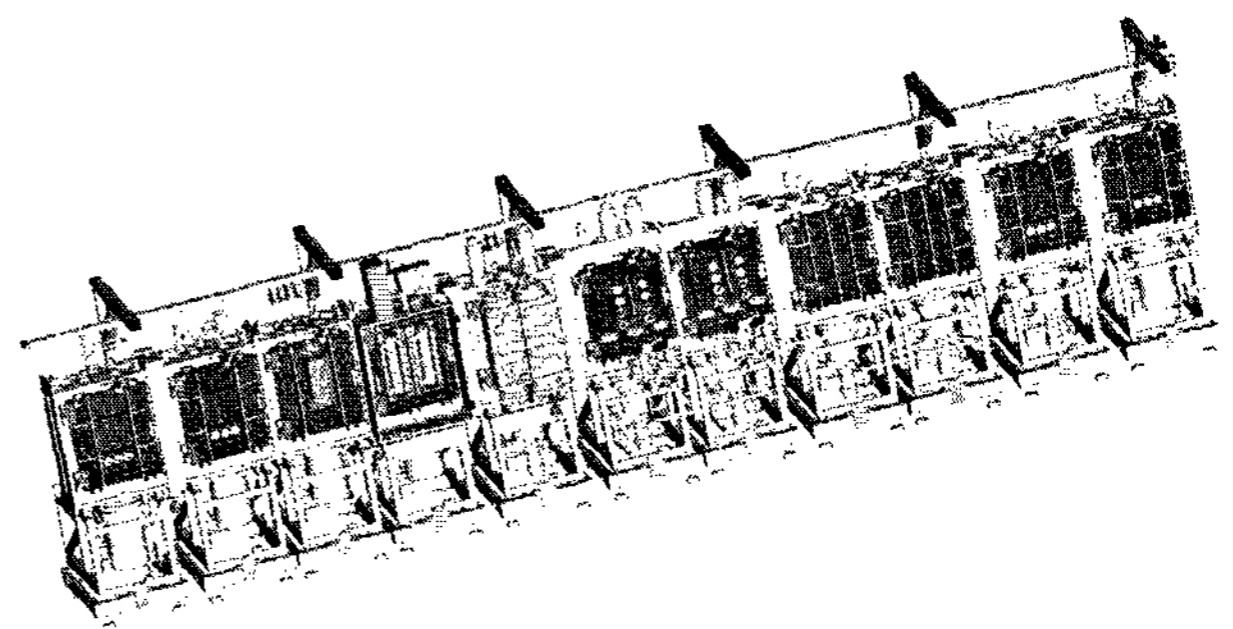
Schematically drawing of a vertical In-Line OLED machine: VES400
